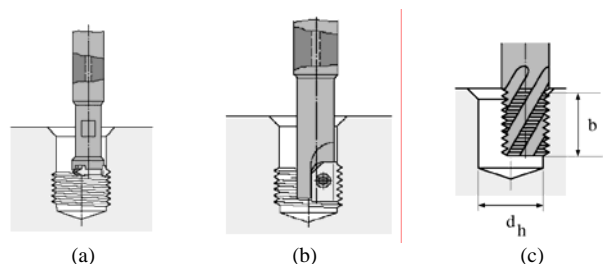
Thread milling tools (a) Single cutting edge, (b) Single straight thread flute, (c) Helical thread flute (Emuge, 2002).
